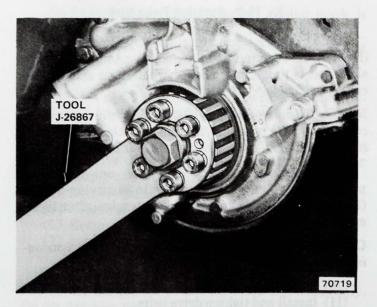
B-13 Removing Camshaft Drive Sprocket from Crankshaft
